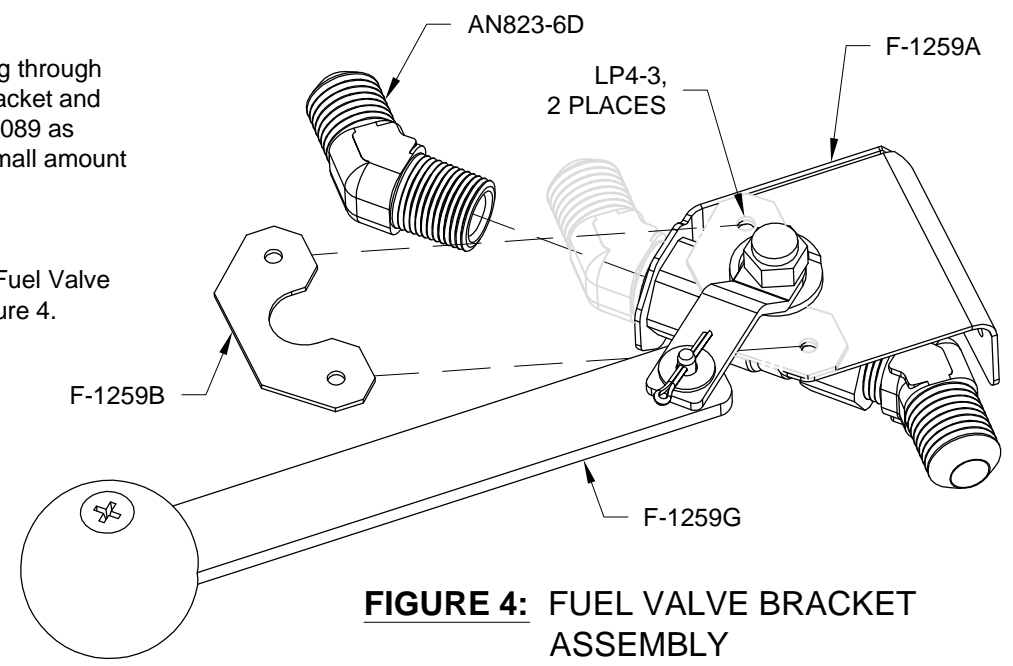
FUEL VALVE BRACKET ASSEMBLY
